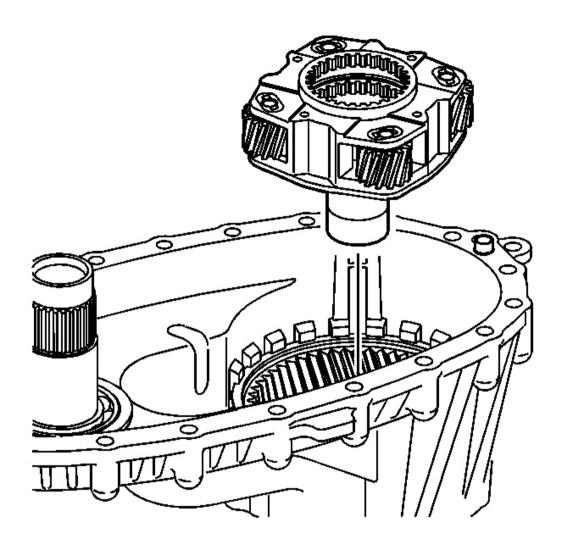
Identifying High/Low Planetary Carrier Courtesy of GENERAL MOTORS CORP.
